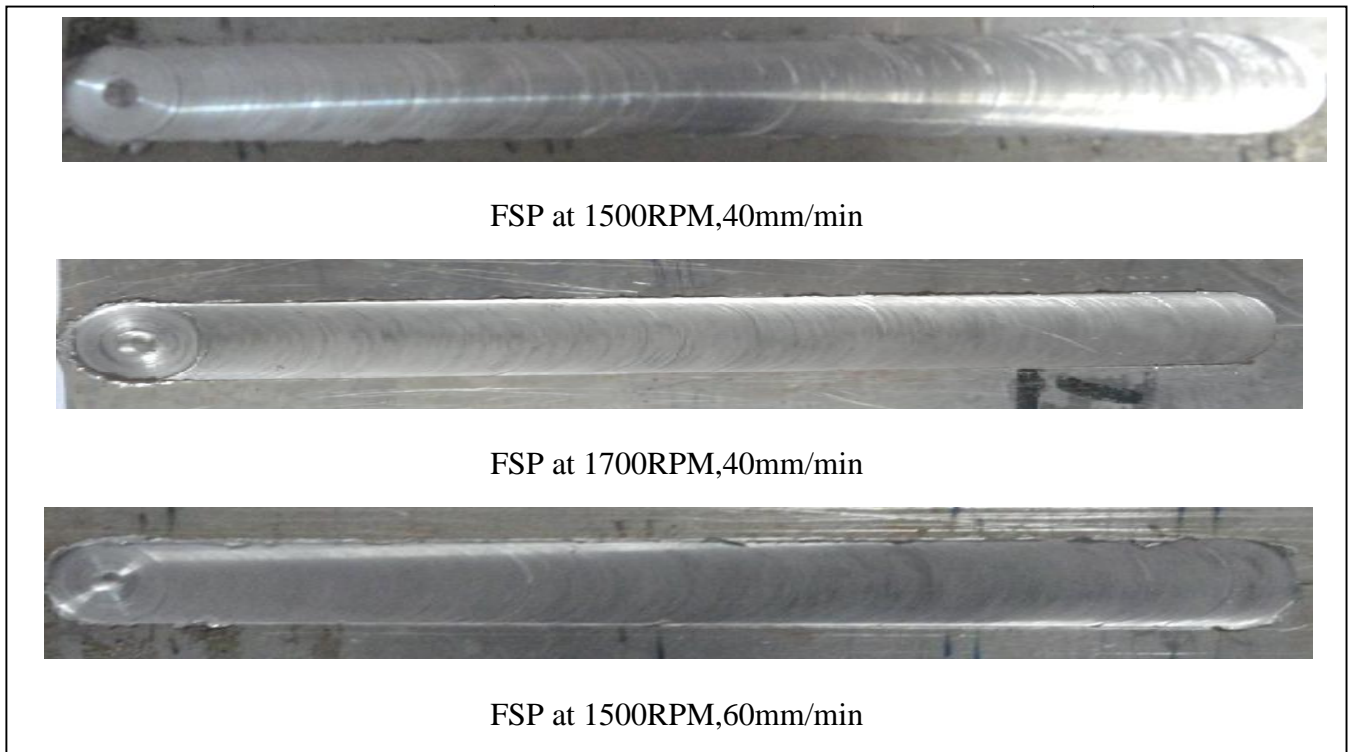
The appearance of upper surface of welding beads of 7075-T73 AA plates produced by FSP.
